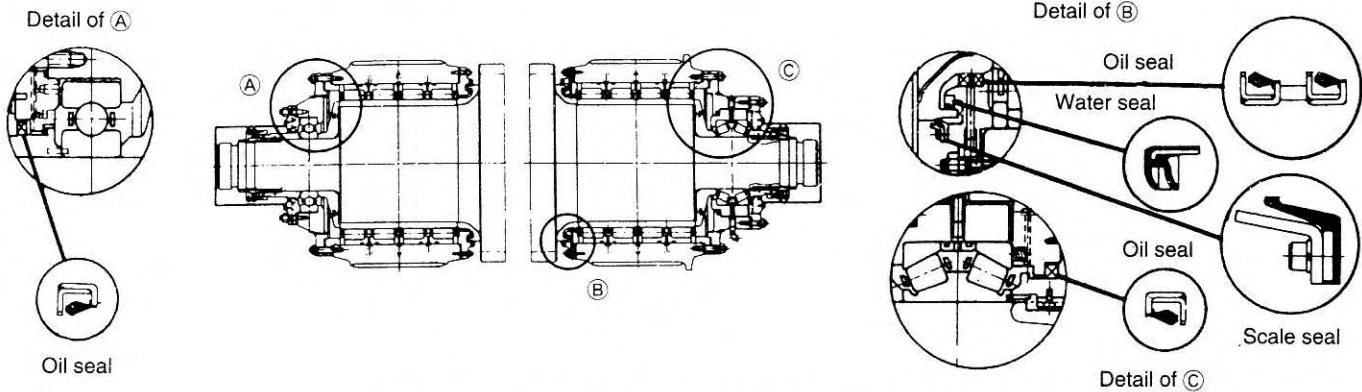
Seals, outboard, and inboard end plates assembly
